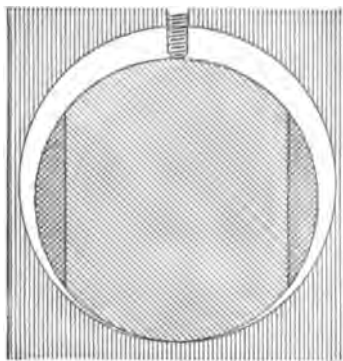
Showing the Contact of a Round Rod in a Round Hole, and held in Place by a set Screw. This Form is used in the Ewing Double Yoke, Ewing Bridge, etc. The Double Cross Hatching shows the Portion that may be Removed to Form Flat Surfaces for Parallel-jawed Yokes.
